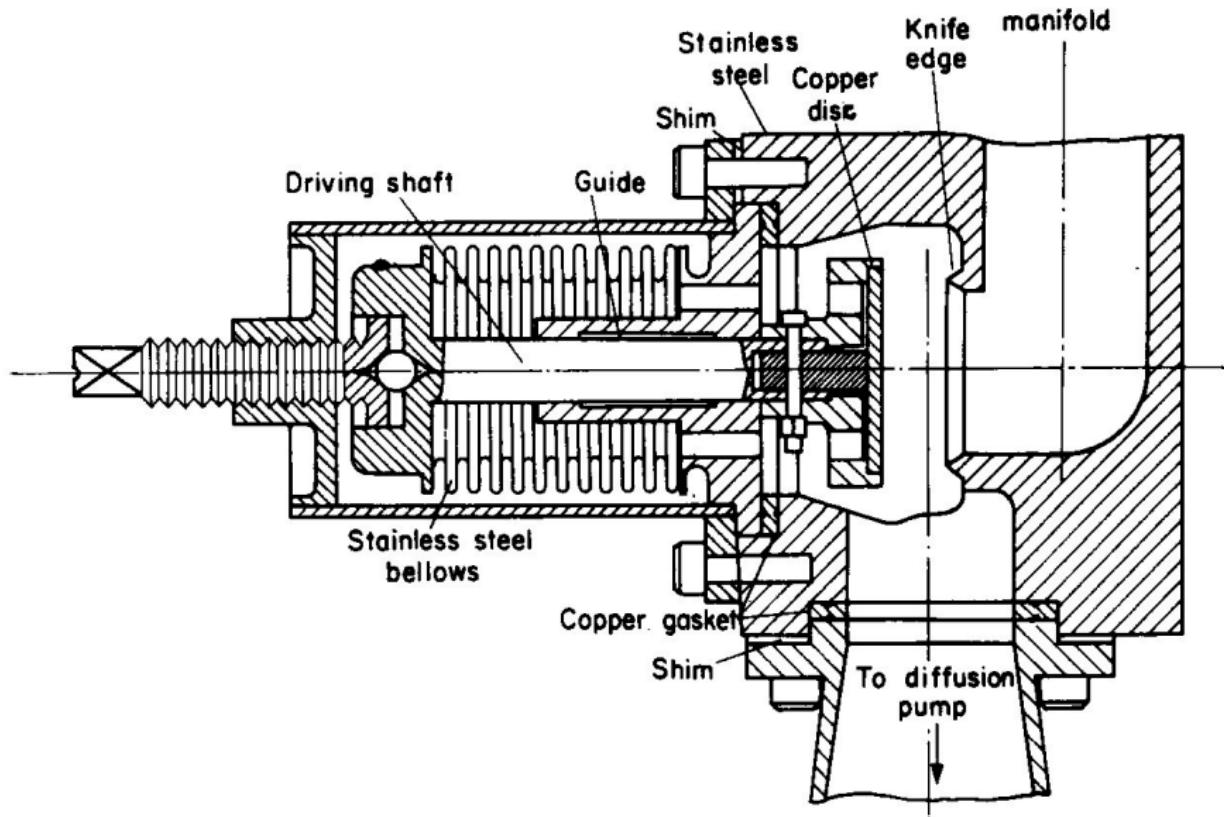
Ultra-high vacuum valve. After Baker (1962).
